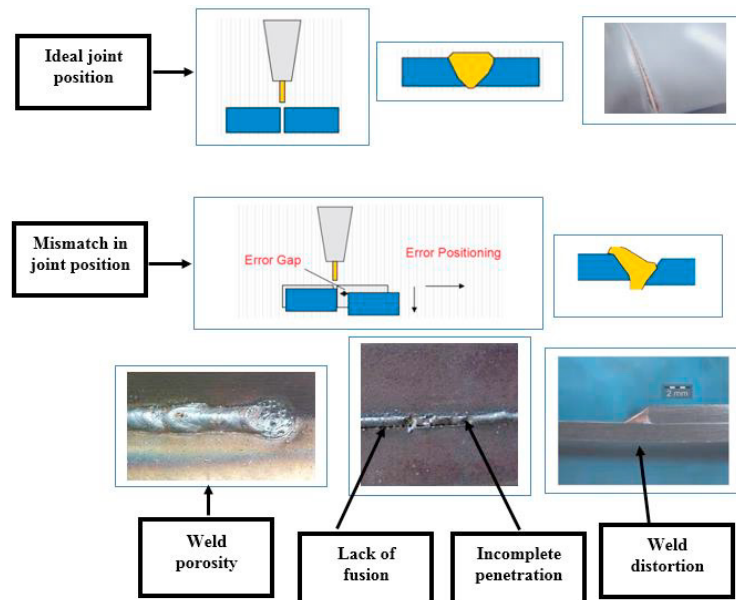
Common weld defects that may be addressed by AI in welding automation.
